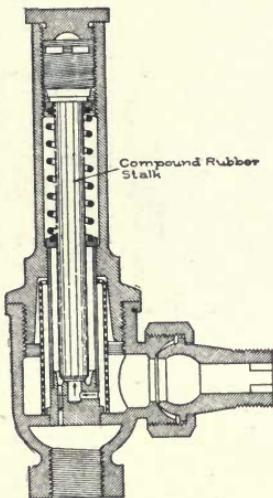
Thermostat Attached to Angle-Valve with Top Removed.
